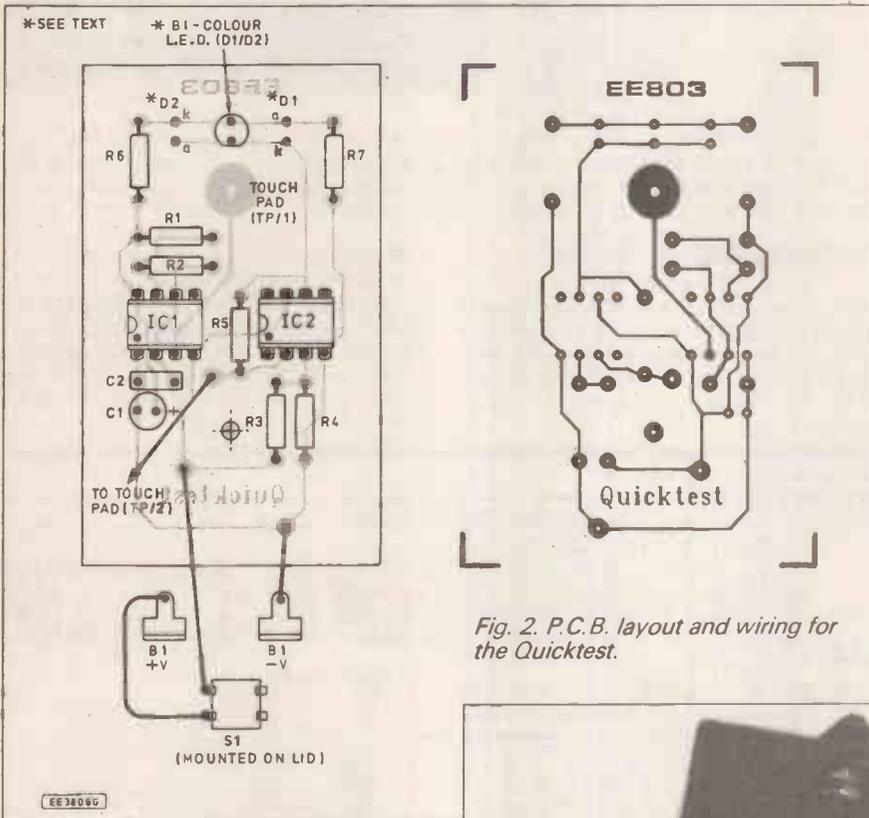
P.C.B. layout and wiring for the Quicktest.
